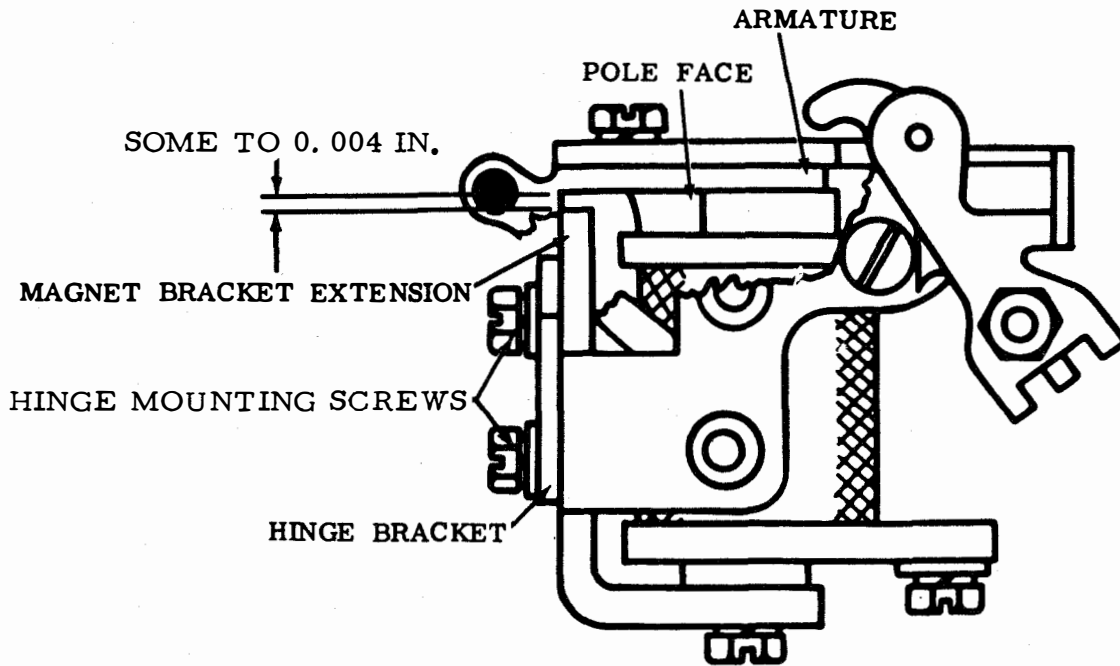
Power Driven Backspace Mechanism Armature Hinge, Perforator
